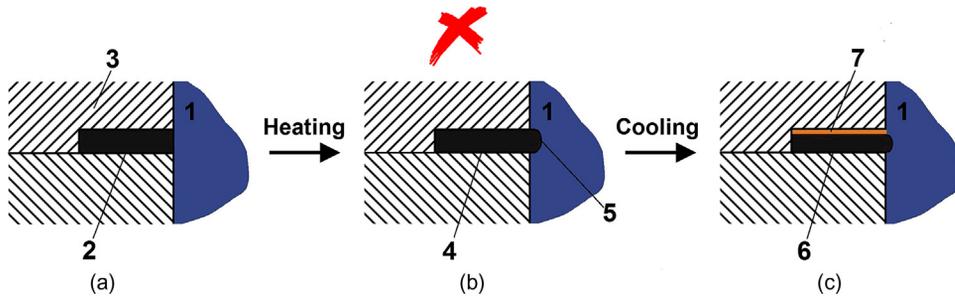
(a) A non-resilient flat PTFE gasket (2) is installed in a rectangular groove and compressed between the sealing faces of two stainless steel surfaces (3) to separate the product area (1) from the outside. (b) Because of the large difference in thermal expansion coefficient of both PTFE gasket and stainless steel, a heat treatment changes the shape of the PTFE gasket (4). Protrusion of the gasket (5) takes place. (c) Because of the lack of resilience, the PTFE gasket may become irreversibly deformed (6). Hence, after cooling down, the gasket will not return to its original form and proportions, and as such a crevice (7) will be generated (Lelieveld et al., 2003; Hauser et al., 2007).
